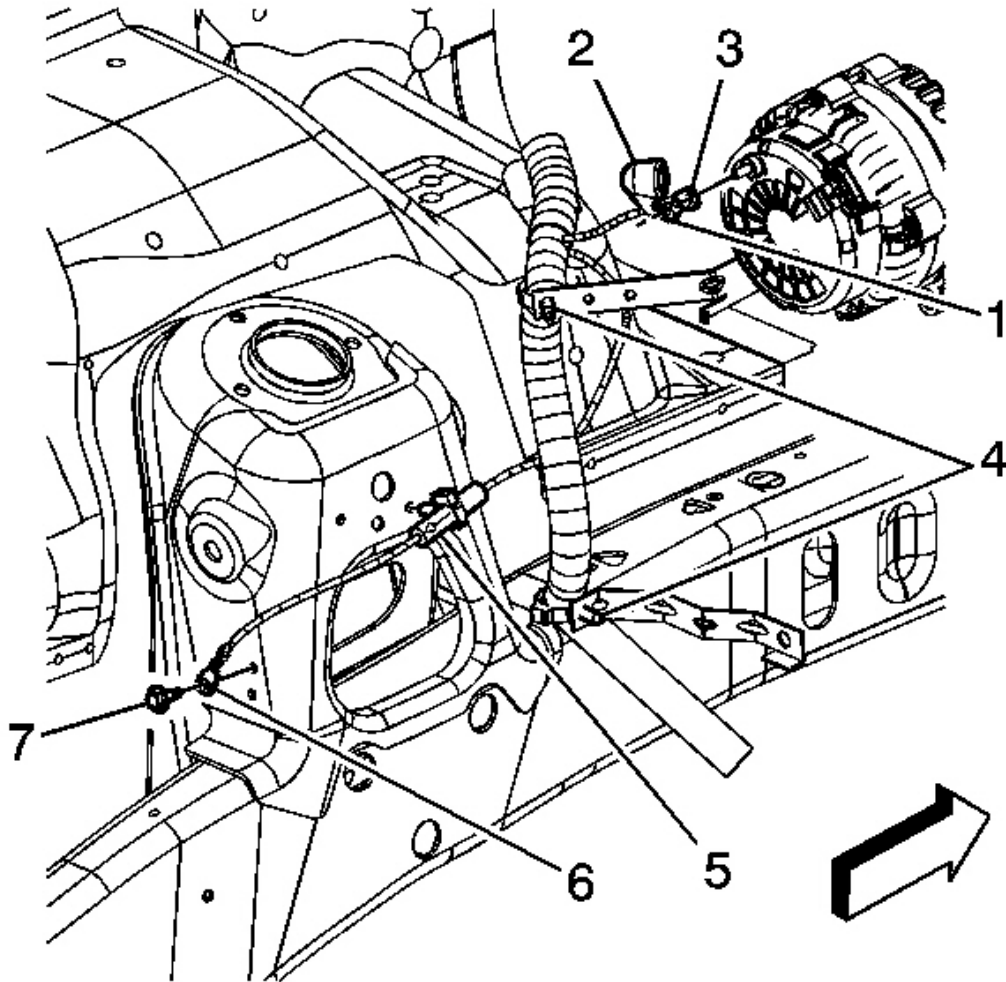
View Of Negative Battery Cable Ground Terminal Bolt At Shock Tower
